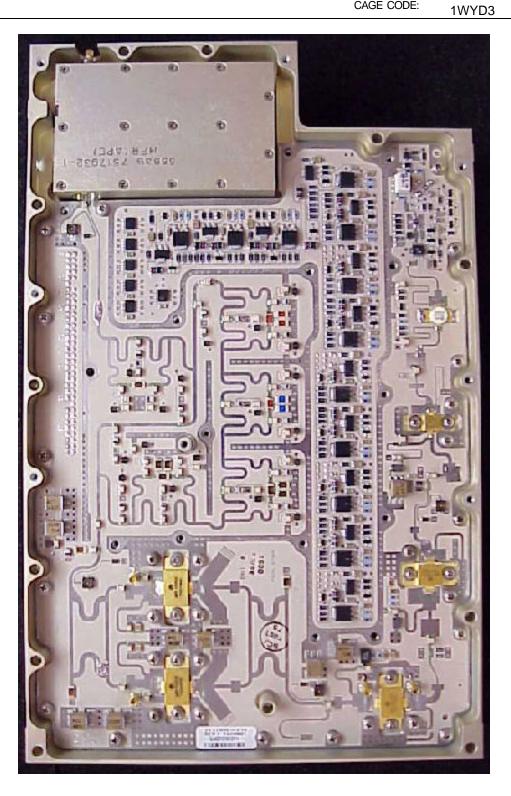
View of A3 Transmitter Assembly With Shield Removed
